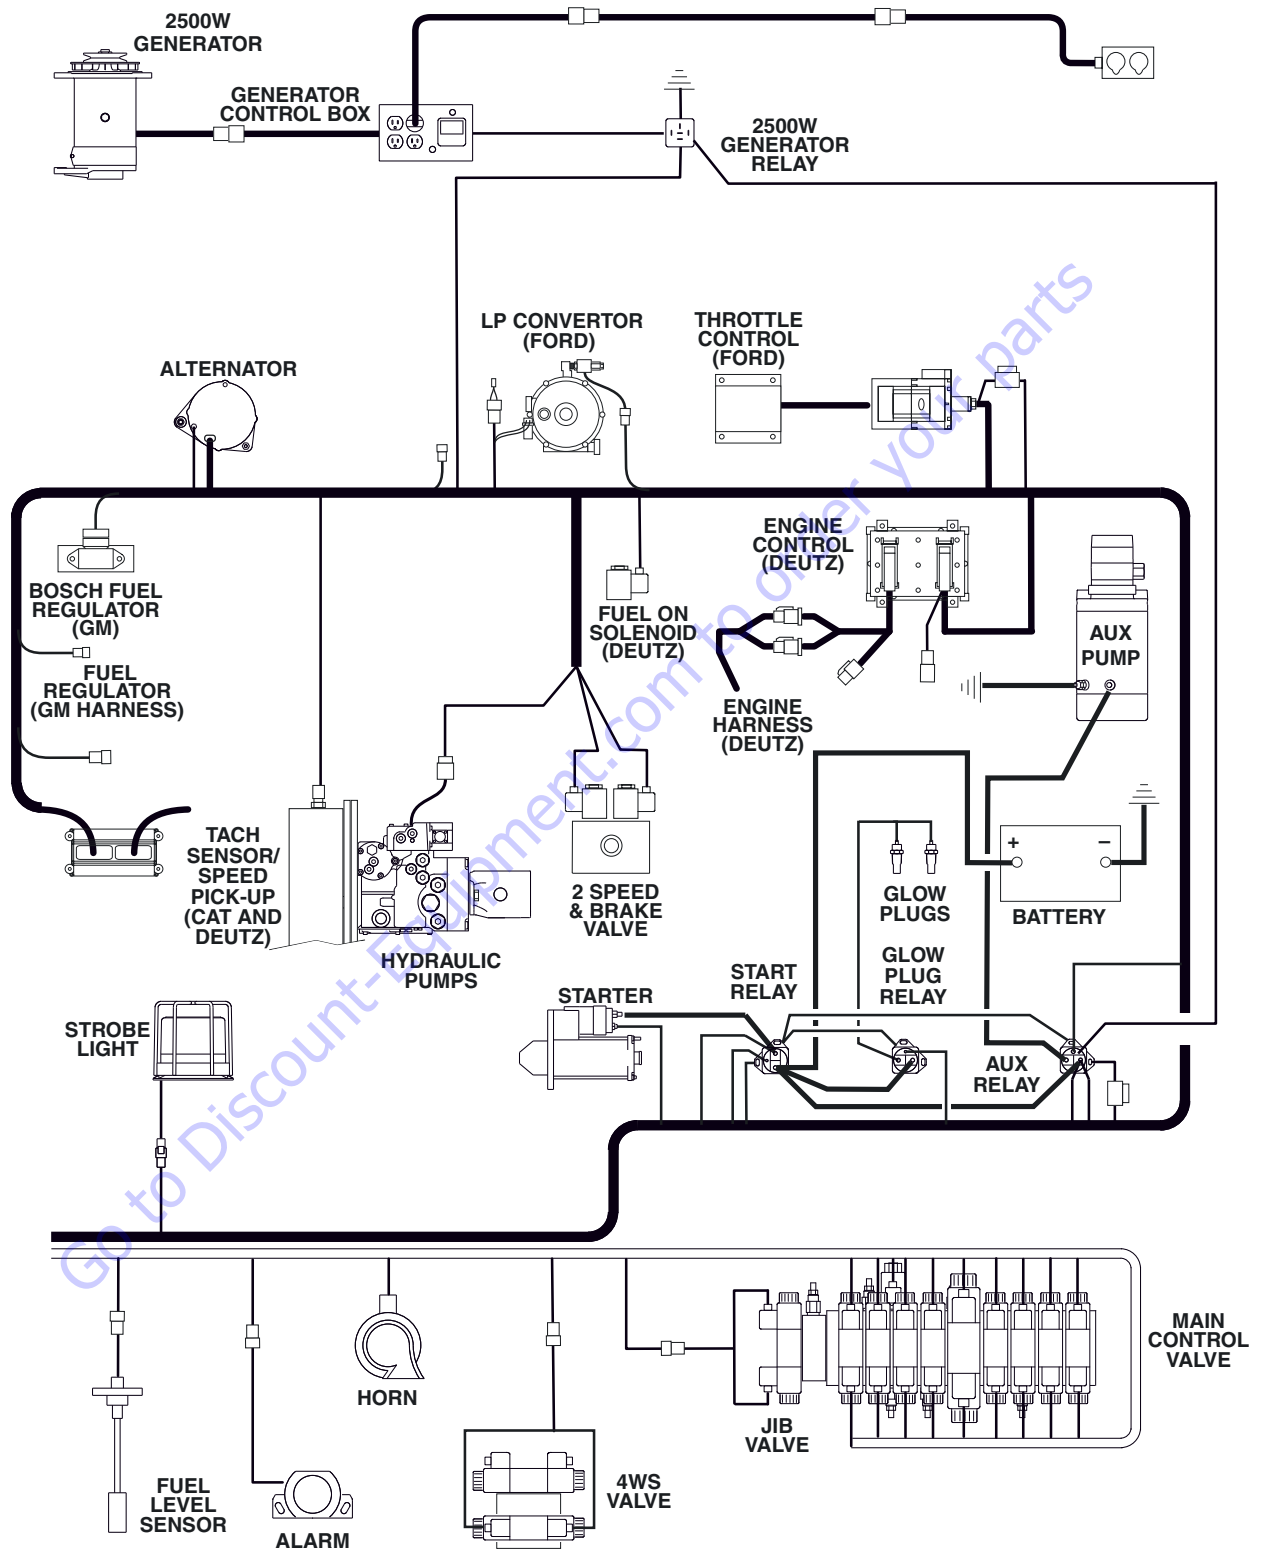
Electrical Components Installation (Prior to SN 0300135982) - Sheet 2 of 2
